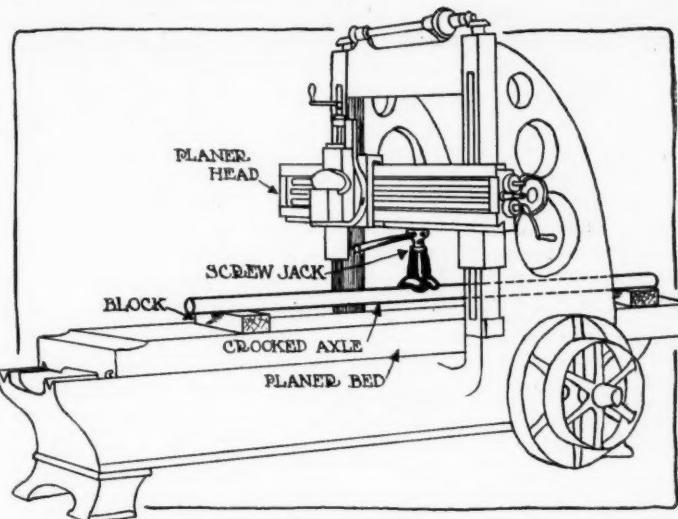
Scheme for using planer to straighten an iron rod, an axle or other similar part. The rod is placed on blocks on the planer bed, then a jack is inserted as shown, and by operating the jack the necessary force to straighten the rod is obtained
